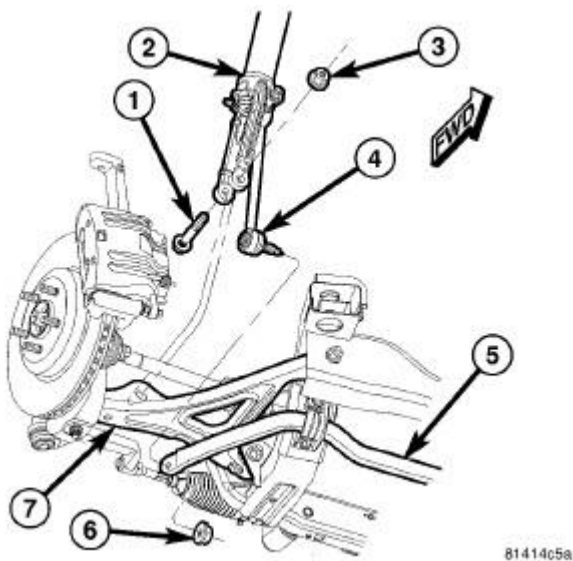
SHOCK ATTACHMENT AT LOWER CONTROL ARM
